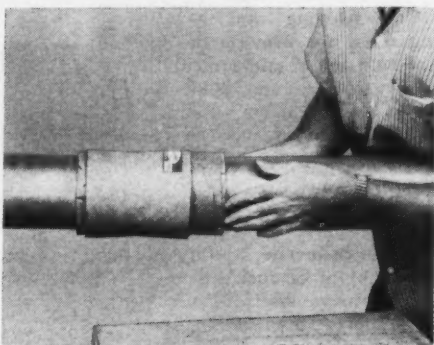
Pipe is inserted into fitting and pressed firmly so that end of pipe contacts bottom of socket
